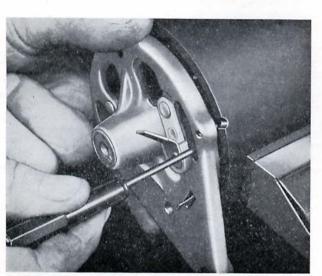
Raising a brush spring to release the brush when assembling the commutator end bracket to the yoke
